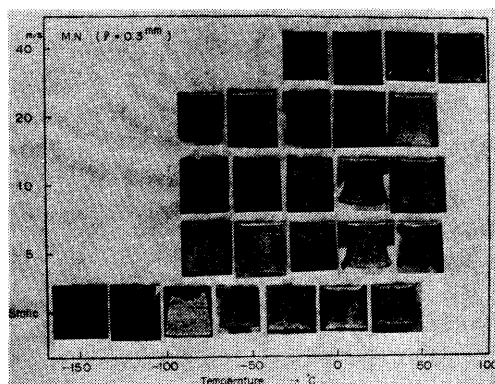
Macroscopic fractured surface in machine-notched specimen for testing temperatures and bending rates ($\rho=0.3$ mm).
